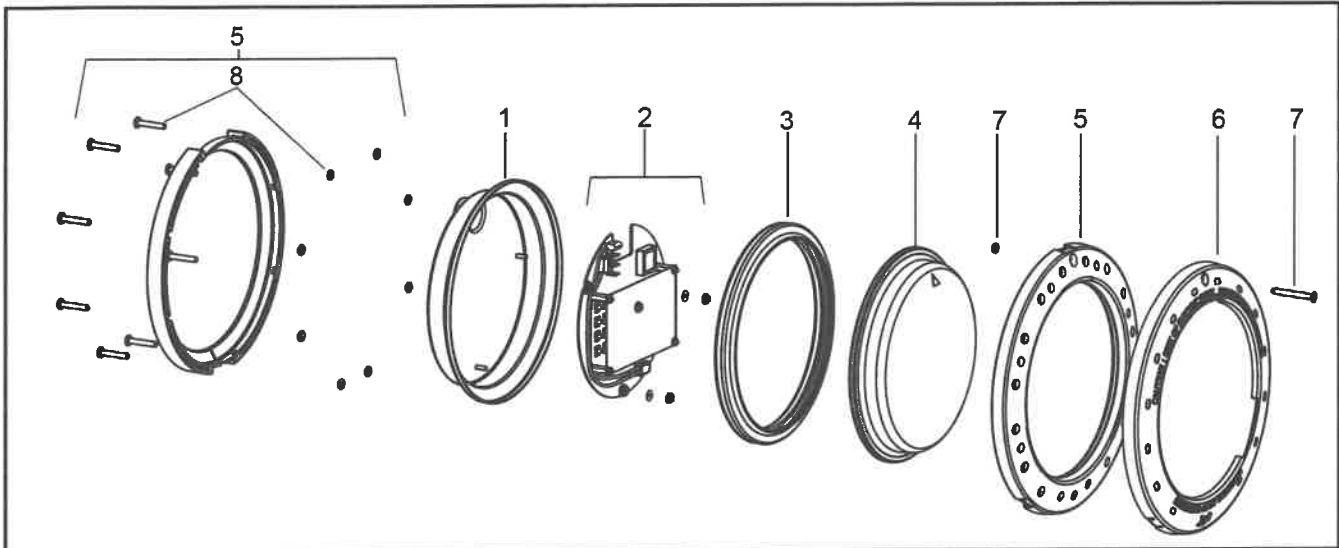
Jandy Pro Series Large WaterColors LED Light Exploded View
